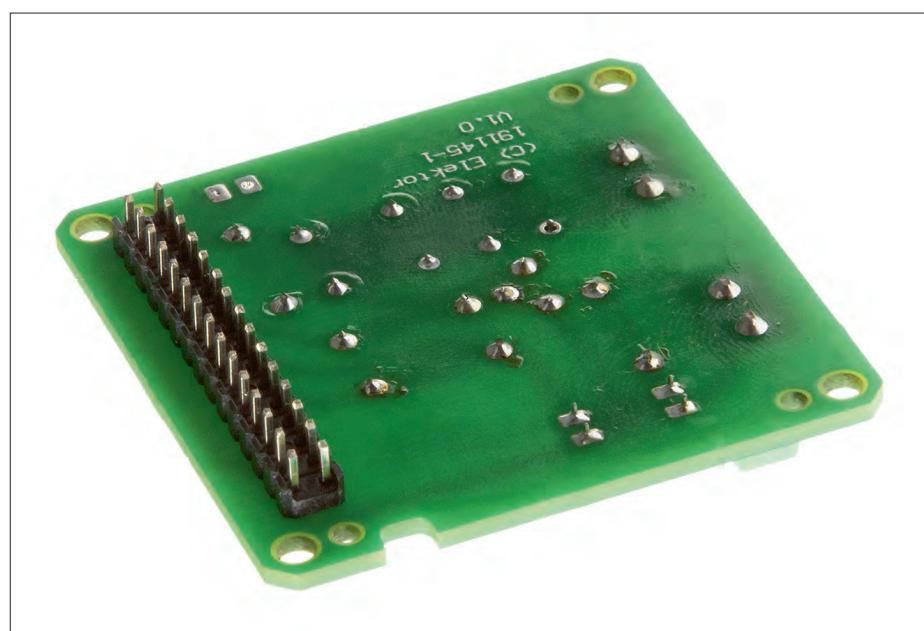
Recommended method of mounting K2: the long pins are inserted from the copper side ('bottom' of the PCB), pushed in upwards, and soldered at the component side.
